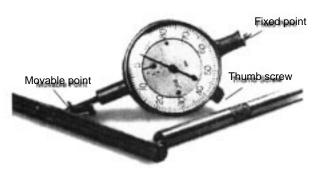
Internal Taper Caliper for 4<sup>1</sup>/<sub>2</sub>-in. OD and Larger Showing Gauge Extensions
